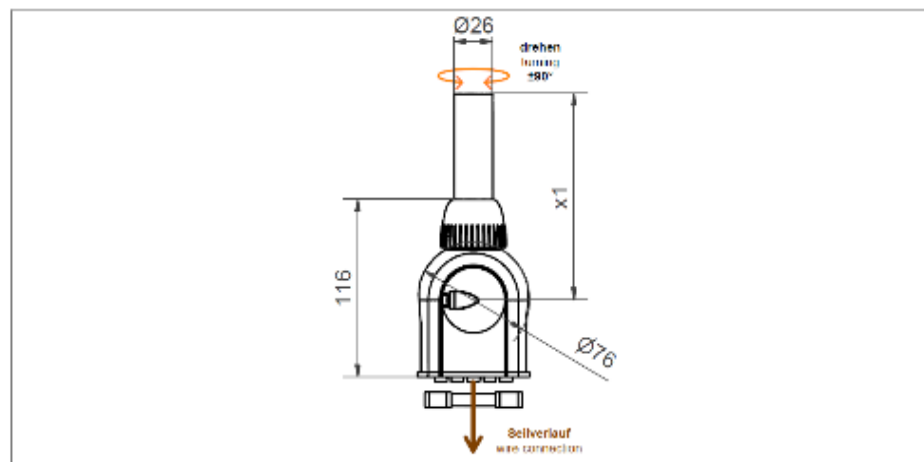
Dimensioned drawing - Rotating joint RL-50-TL1
